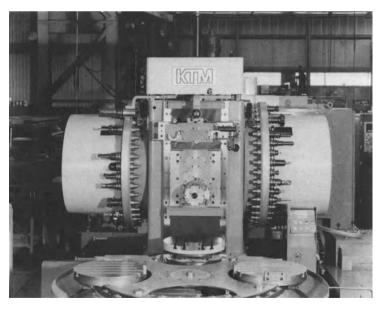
Twin rotary carousels on a palletised horizontal machining centre. [Courtesy of FMT Ltd.]
